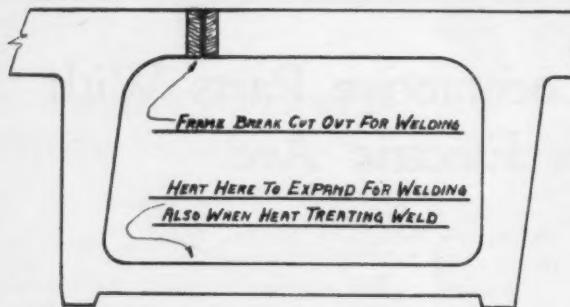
It may be necessary to expand the frame by heating an opposing member.
